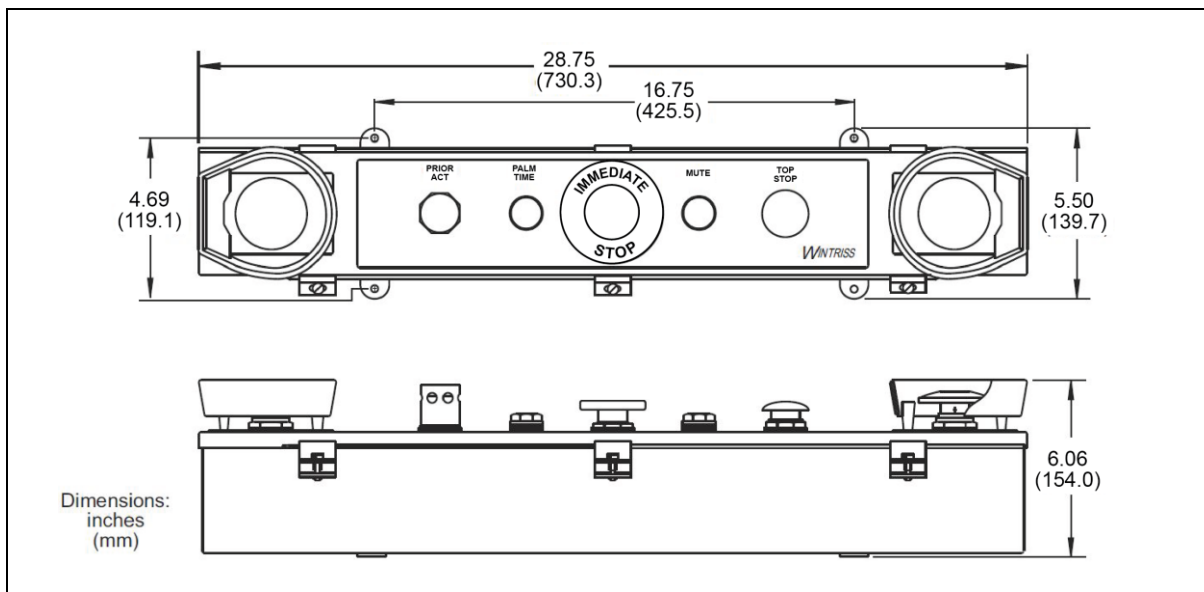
Pre-wired Operator Station with Top Run Buttons: Mounting Dimensions
